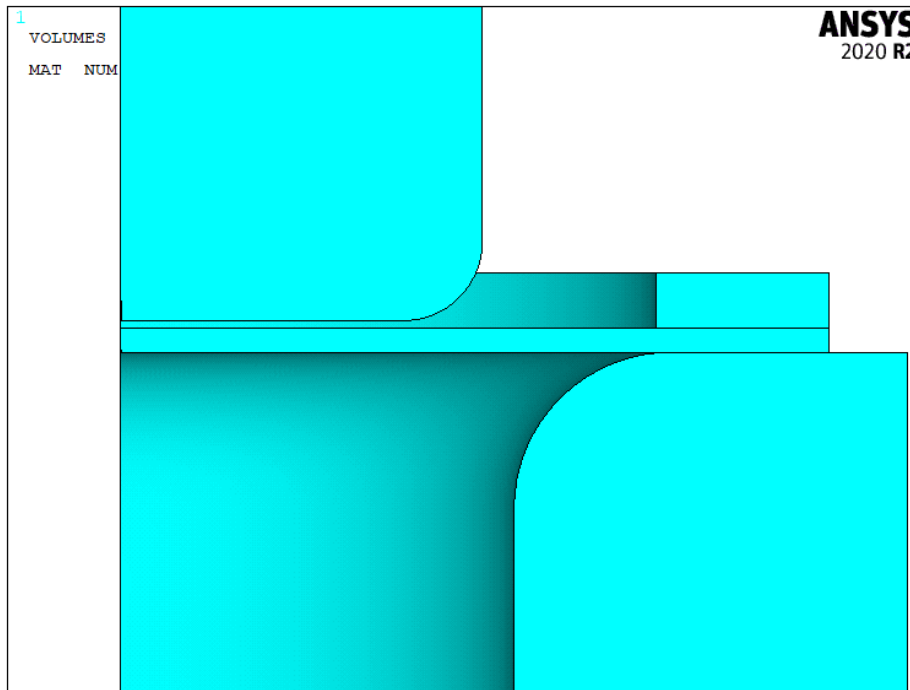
(a): Front view of CAD modeling for cylindrical cup drawing
